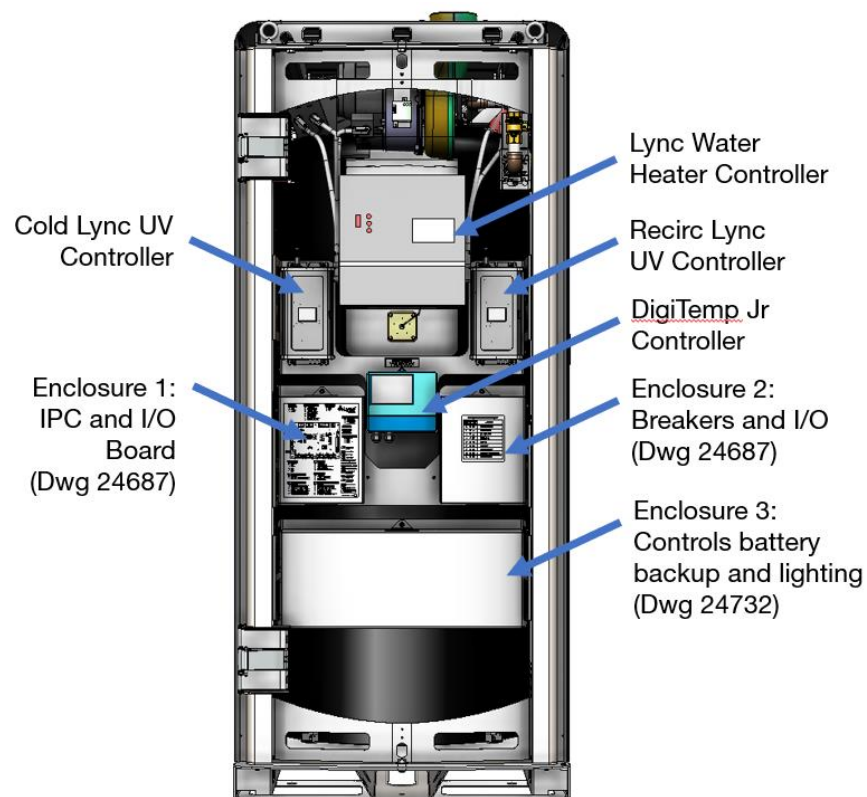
Front of Unit, Door Assembly Removed. See Appendix B.
